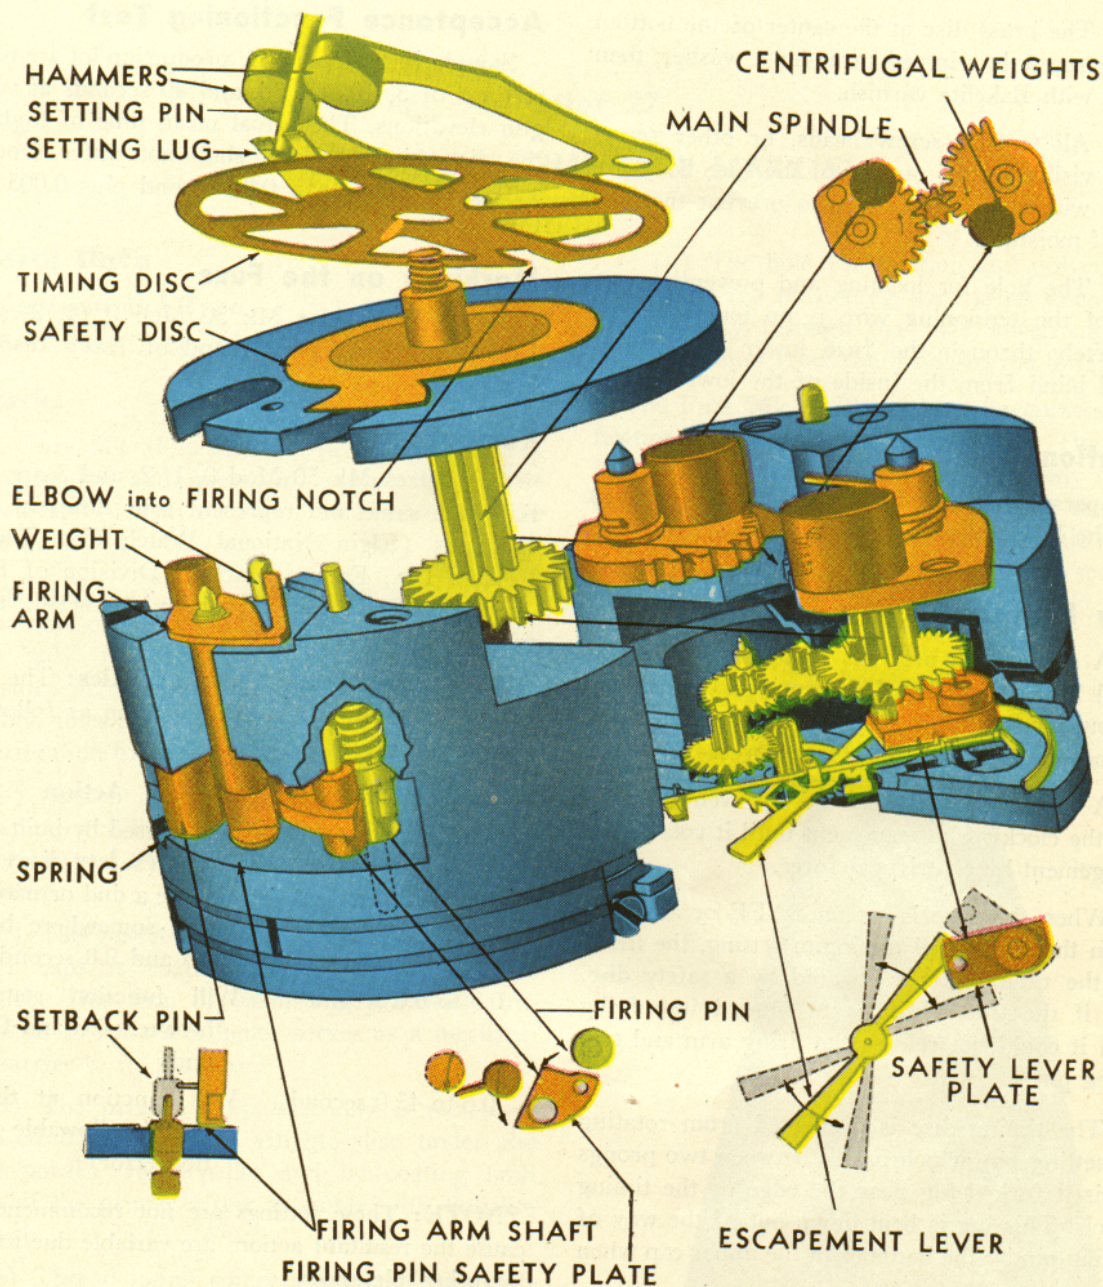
Mechanical Time Fuze Mk 50—Sectional View
